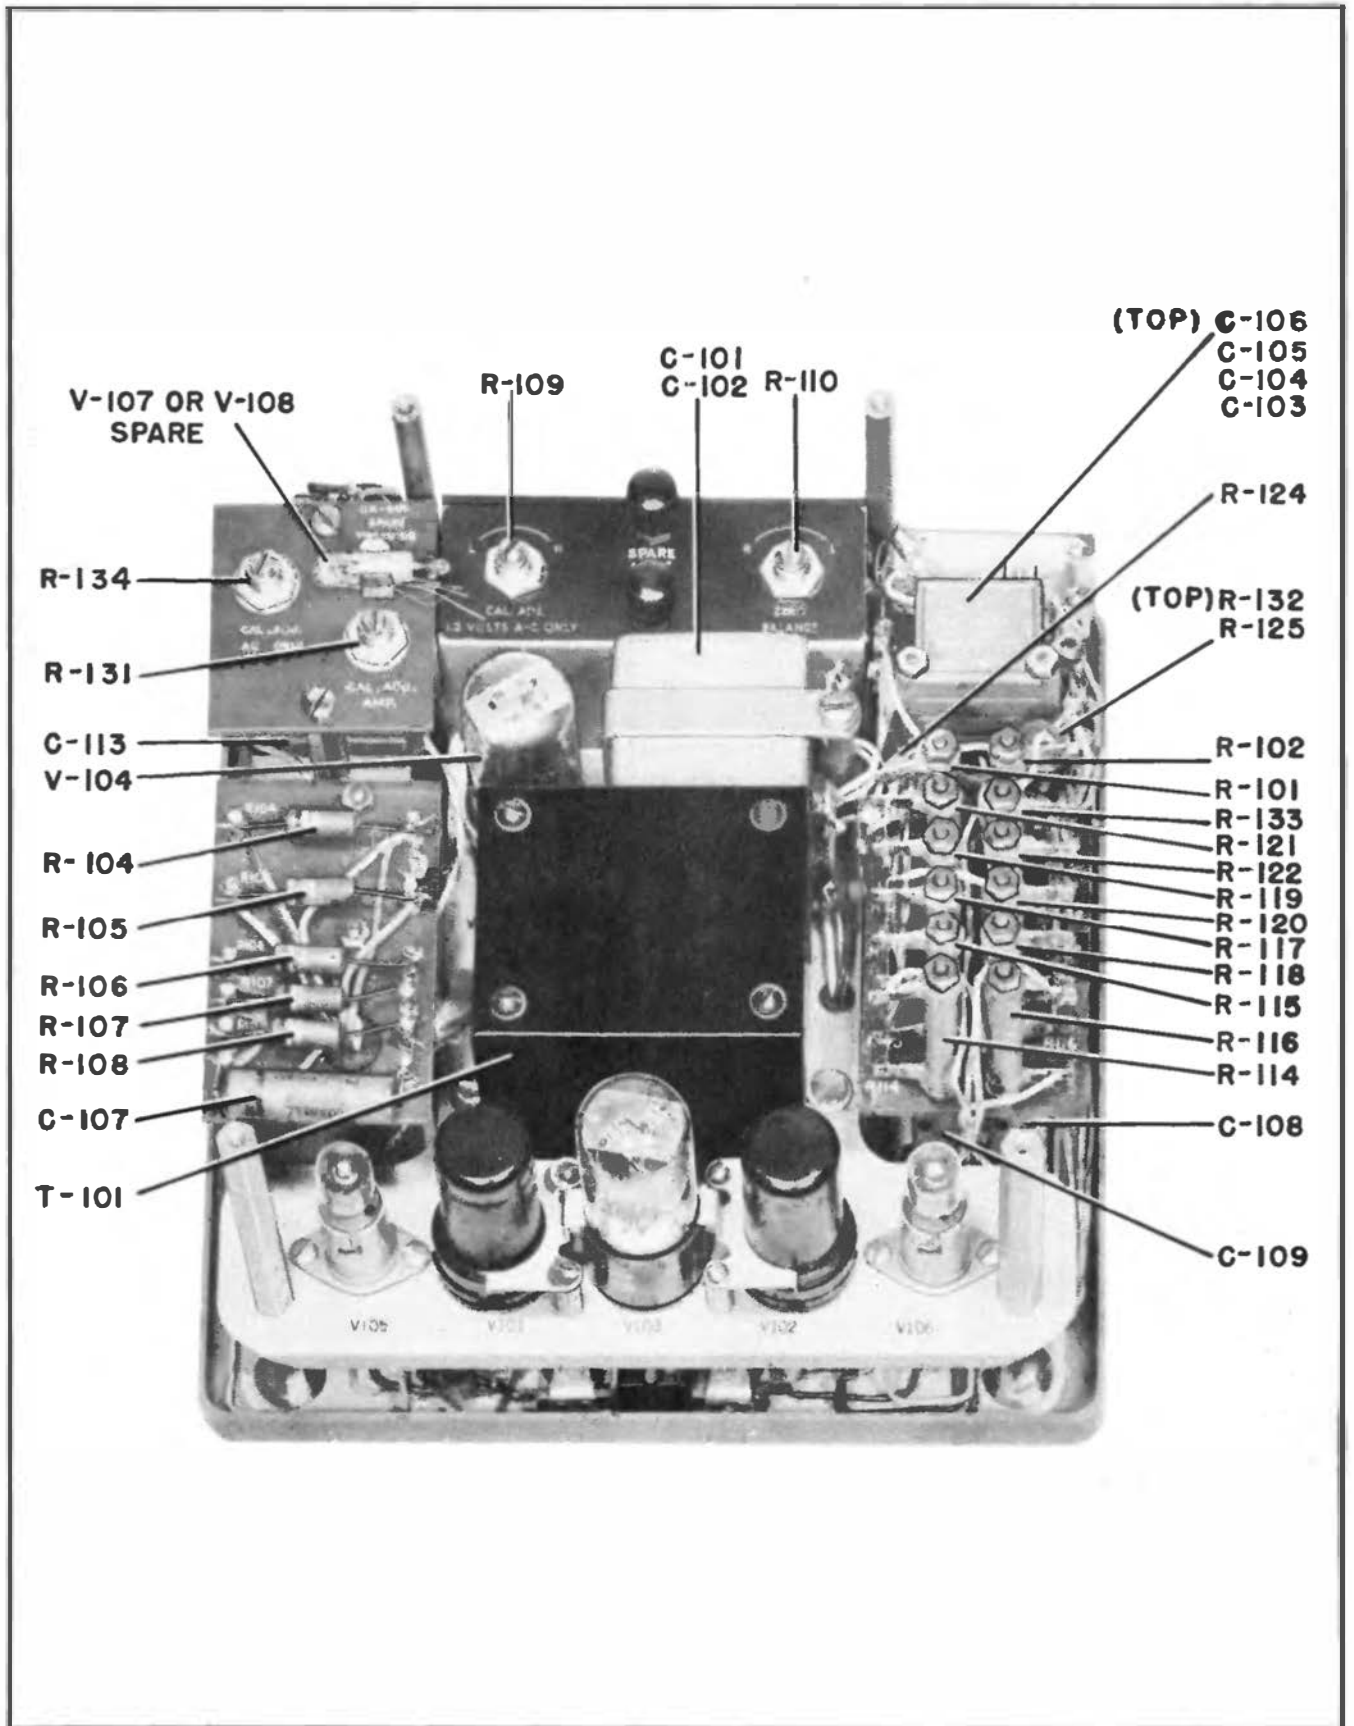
A. Voltmeter TS-375A/U, Internal Rear Oblique View
